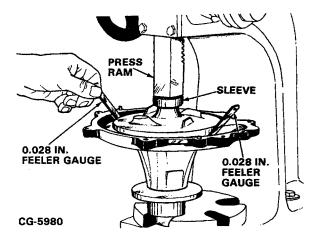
Press on Impeller and Check Impeller to Housing Clearance
